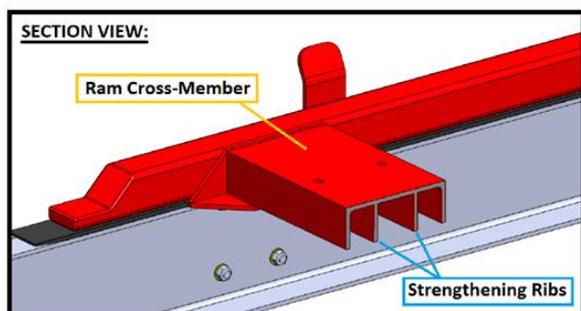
Cross Section of Ram cross-member w/ strengthening ribs
